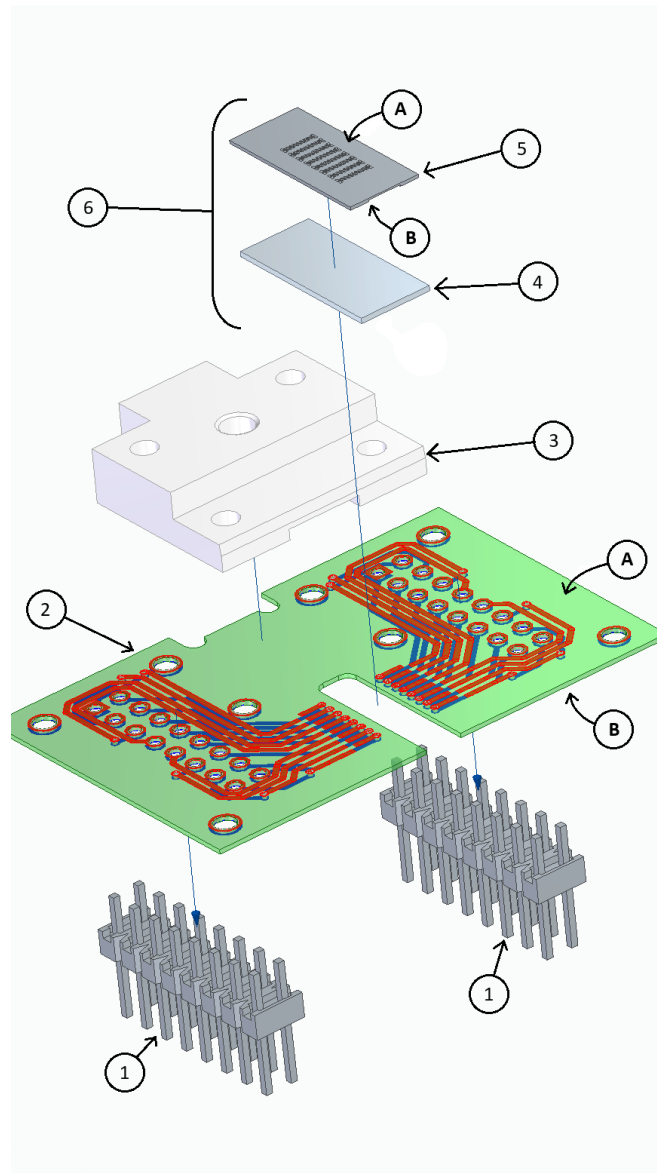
Exploded view of the assembly for a thruster with nozzle. The flow of propellant is from the top left towards bottom right.
